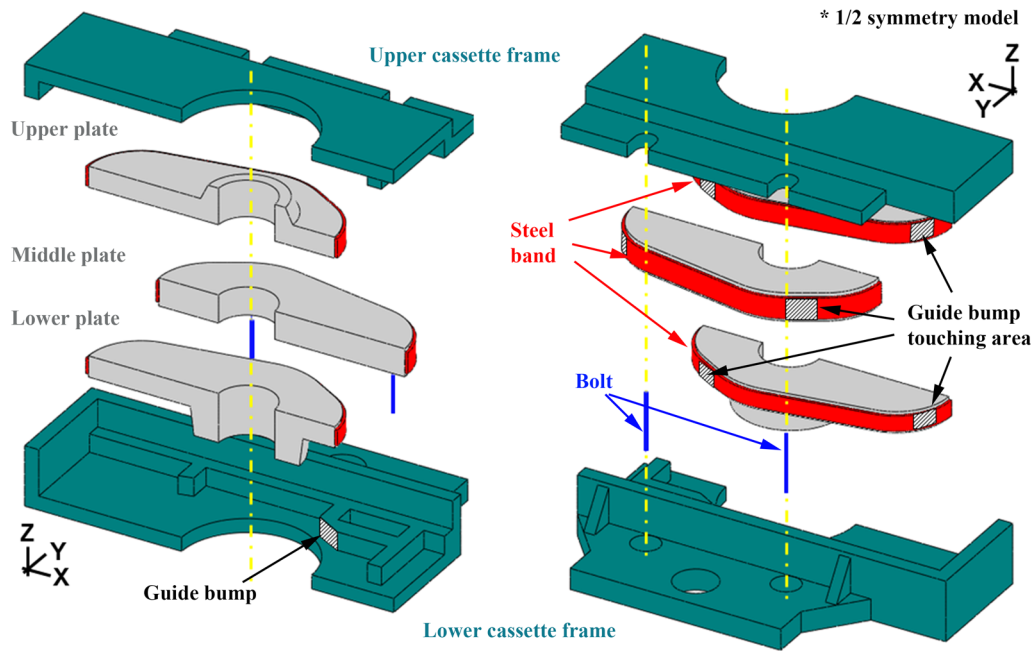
Exploded view of tundish-nozzle slide-gate assembly.
